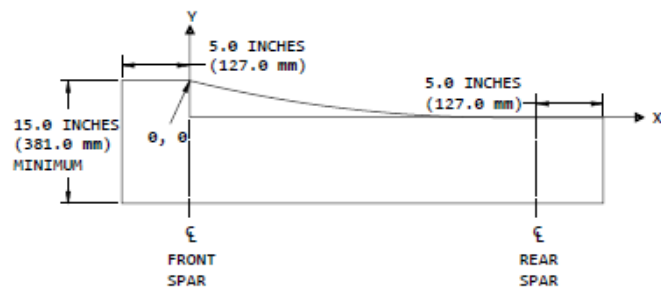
Wing Cradle and Horizontal Stabilizer Support Saddle : Sheet 1
